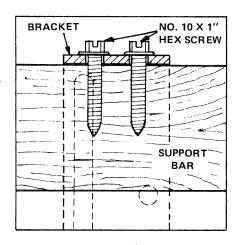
A Cross-section view of mounted Bracket (on TOP of Bar).
